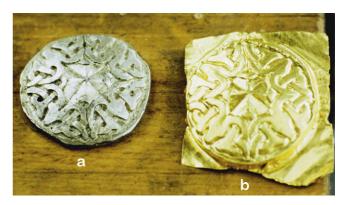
Experimental production of pressed sheet using a pointed tool. a: die; b: pressed sheet.
